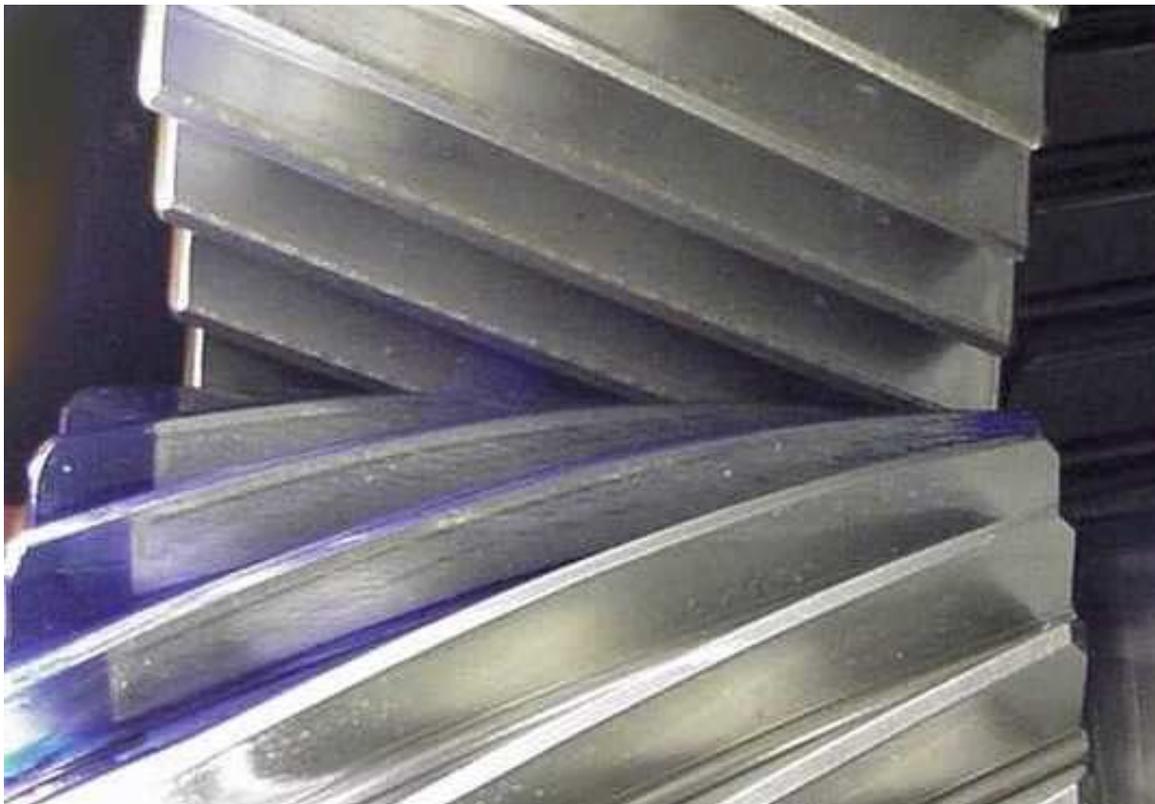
EXAMPLE OF CONTROLLED WEAR GEAR TOOTH CONTACT PATTERN
